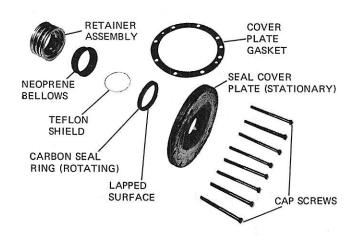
COMPRESSOR SHAFT SEAL — EXPLODED VIEW
